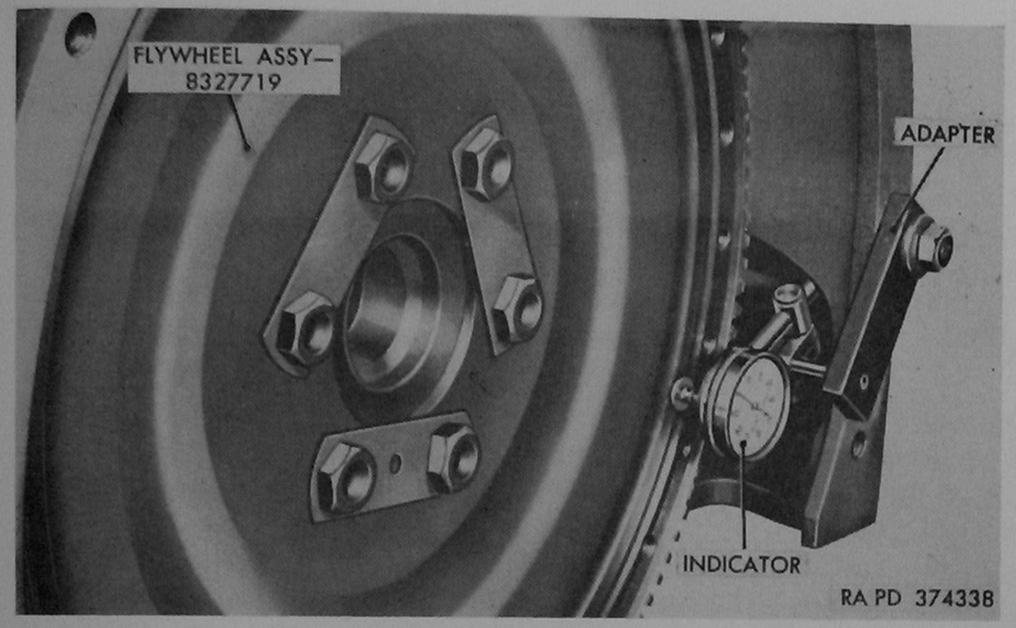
Checking flywheel runout-engine assemblies 7411599 and 8329440 shown.
